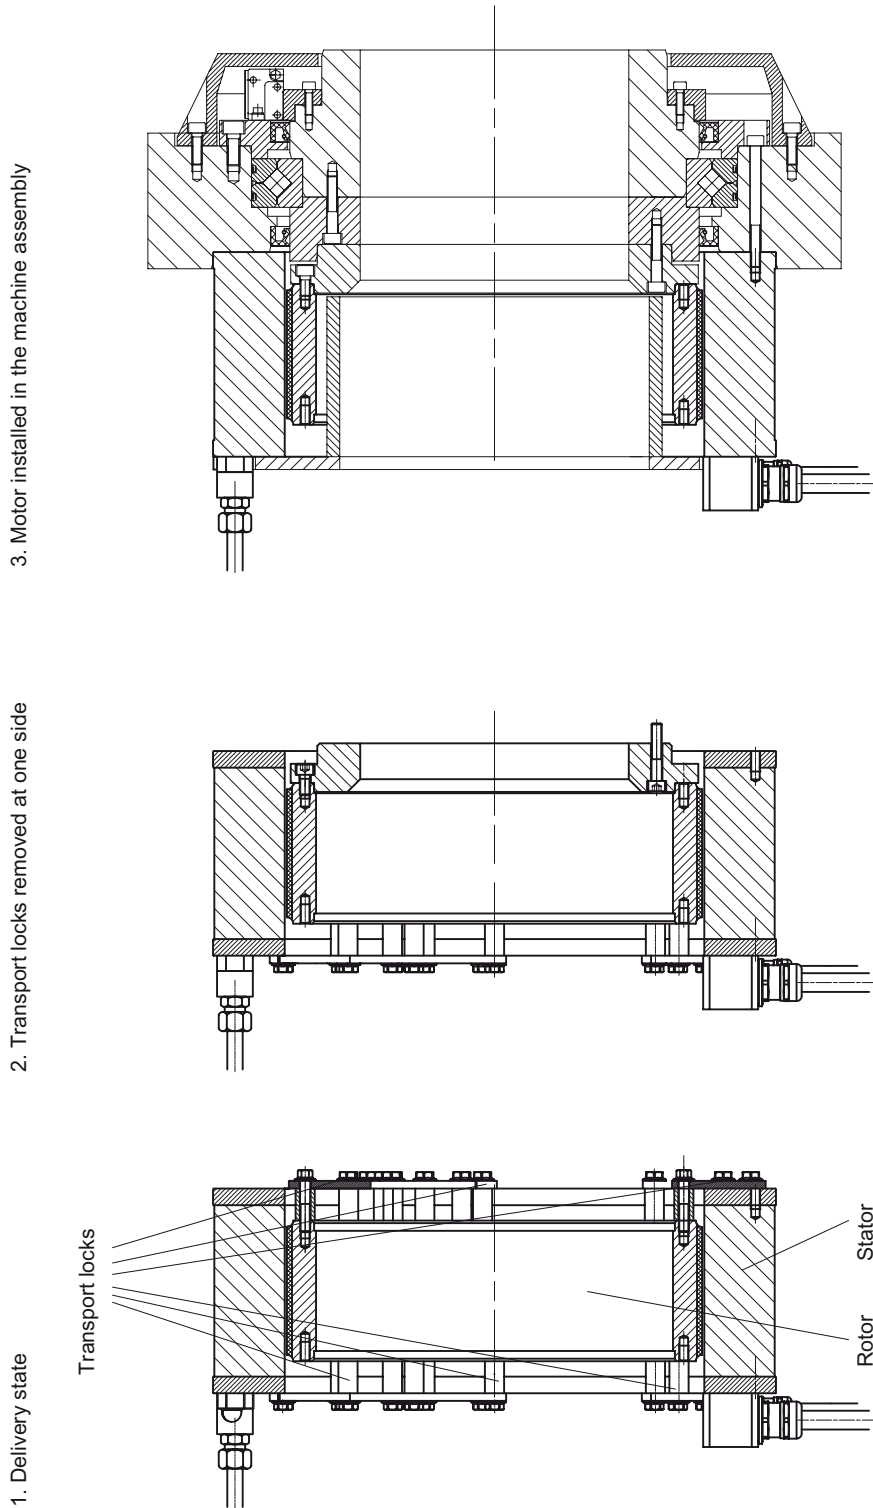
Installing a torque motor with integrated cooling on the shaft extension of a part-turn actuator
